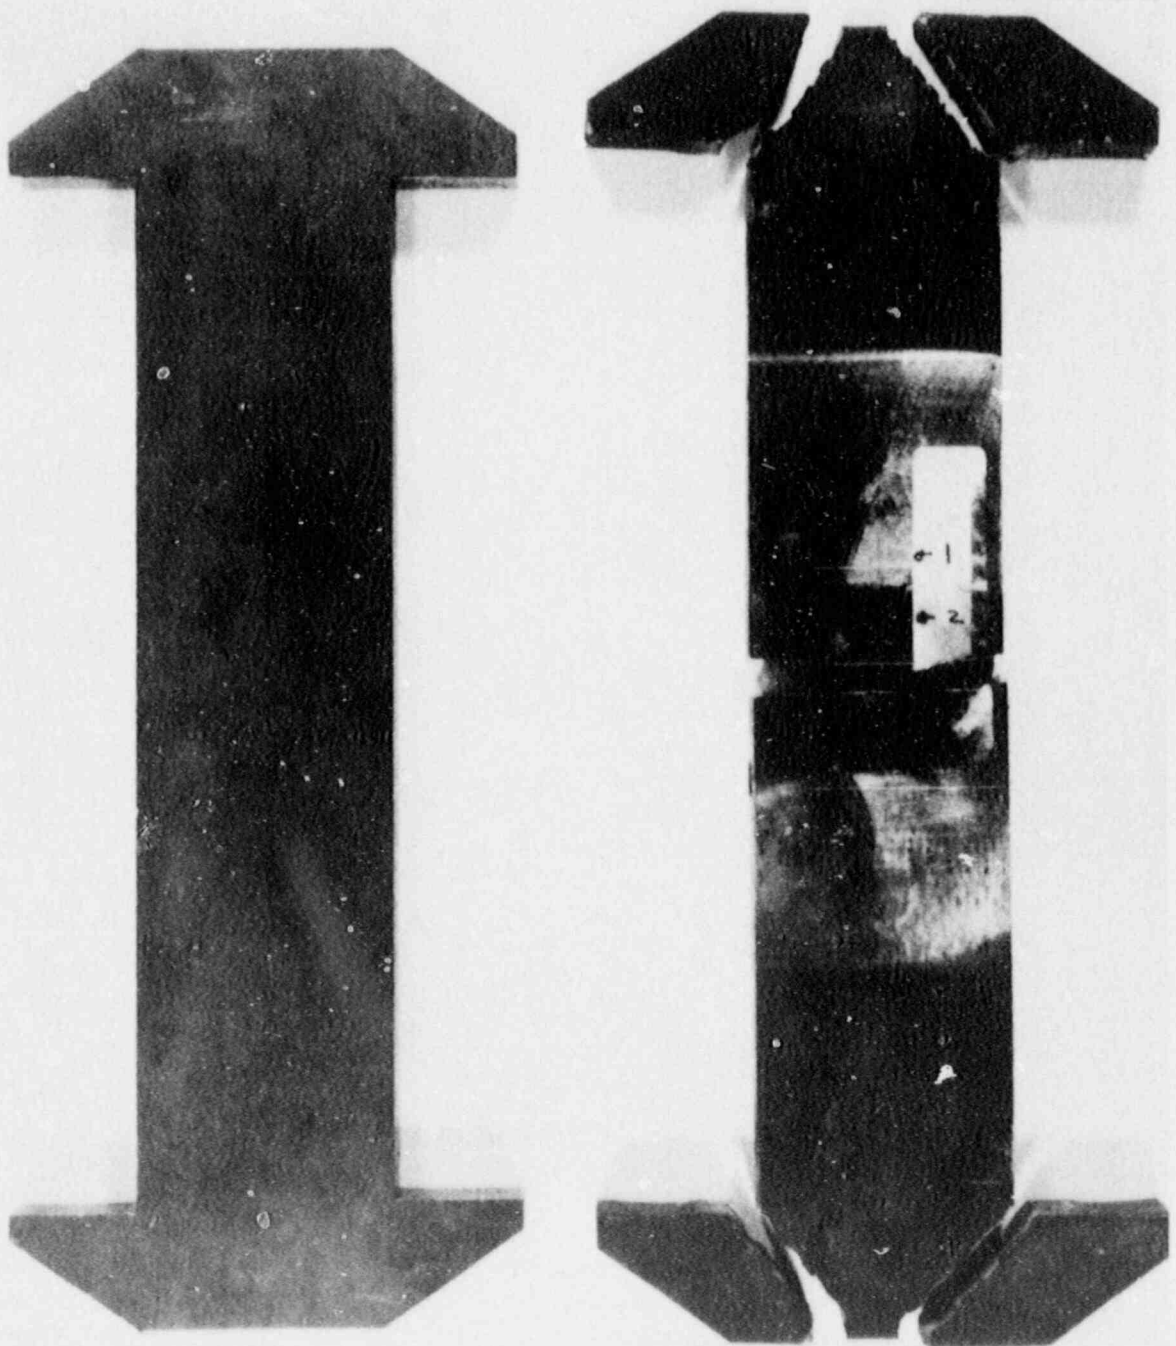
Short-bar specimen before and after explosively induced fracture.
